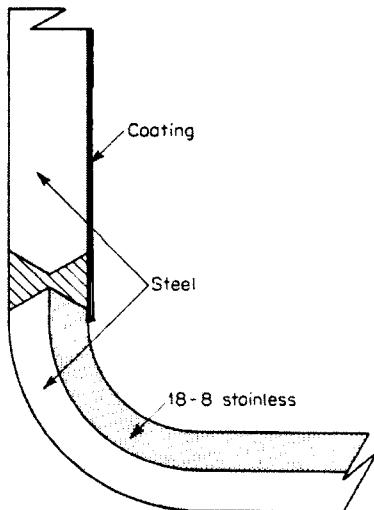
Detail of welded steel and stainless clad tank construction.
